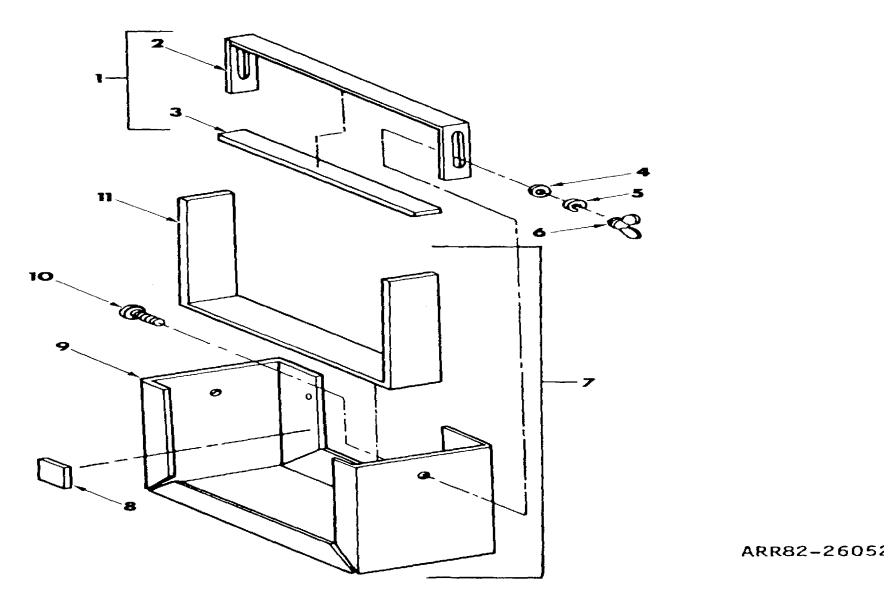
Holder assembly, first aid kit 7551436; holder assembly 7551434; and bracket assembly 7551435.
